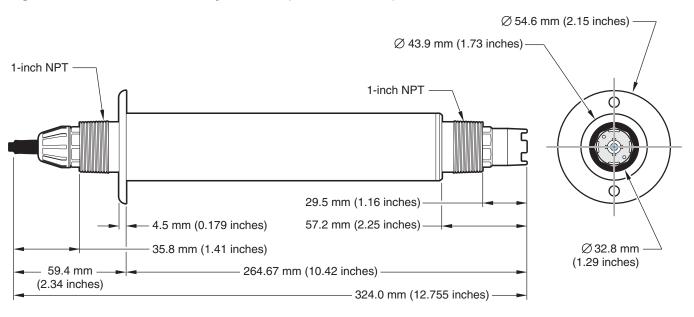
Stainless Steel Style Sensor (DPS1 and DRS5) Dimensions
